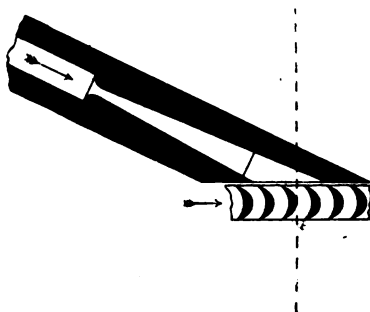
A.—Section of Nozzle of De Laval Steam Turbine.
